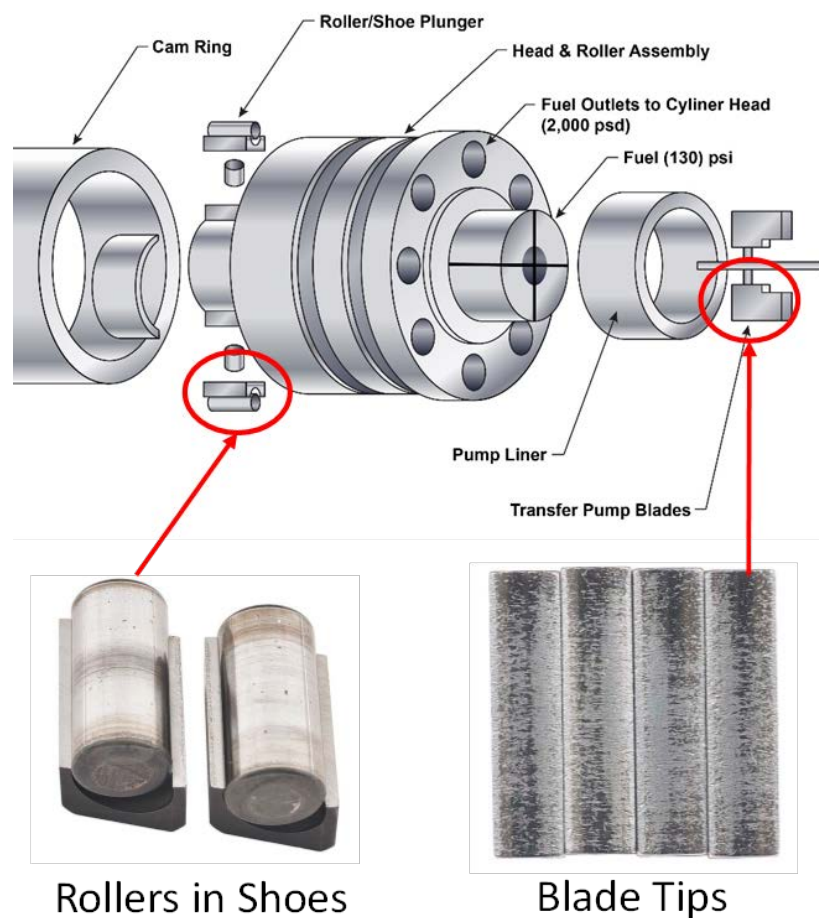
Exploded view of Stanadyne pump, with 2 critical components identified
